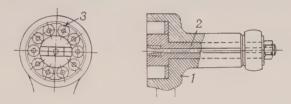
Diagrammatic representation of a swaging machine: 1—housing; 2—shaft; 3—rollers
